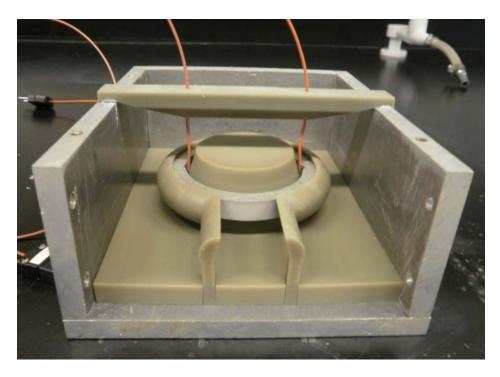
Thermocouple Placement PCCC Mould with Insert
